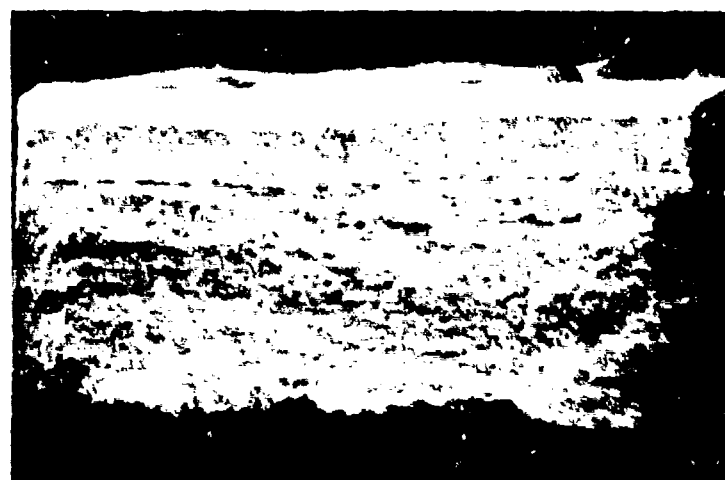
Tensile fracture surface of an A-242 transverse specimen, 12x.
